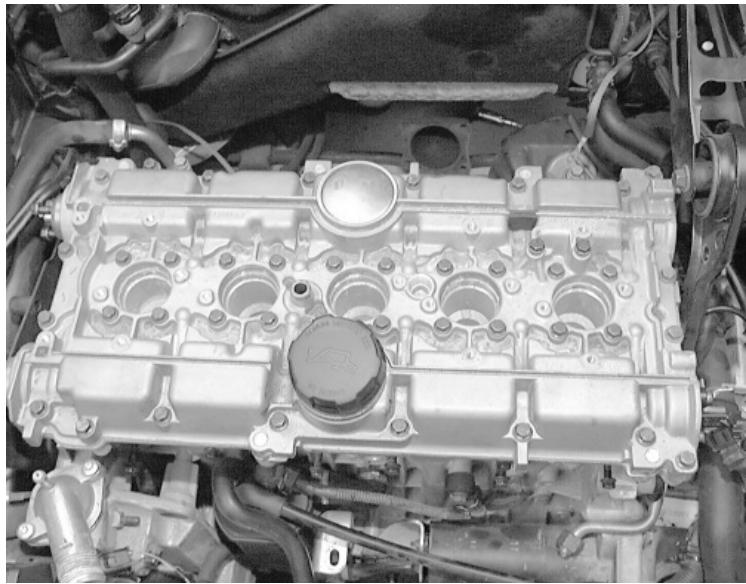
Remove the spark plug cover and the plug wires or ignition coils to access the retaining bolts
